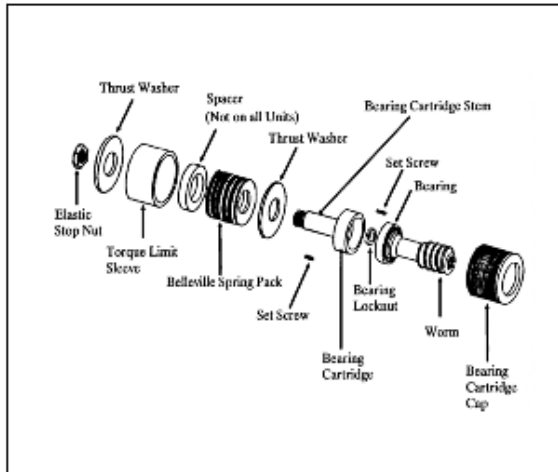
SMB/SB-0 Spring Pack Assembly
